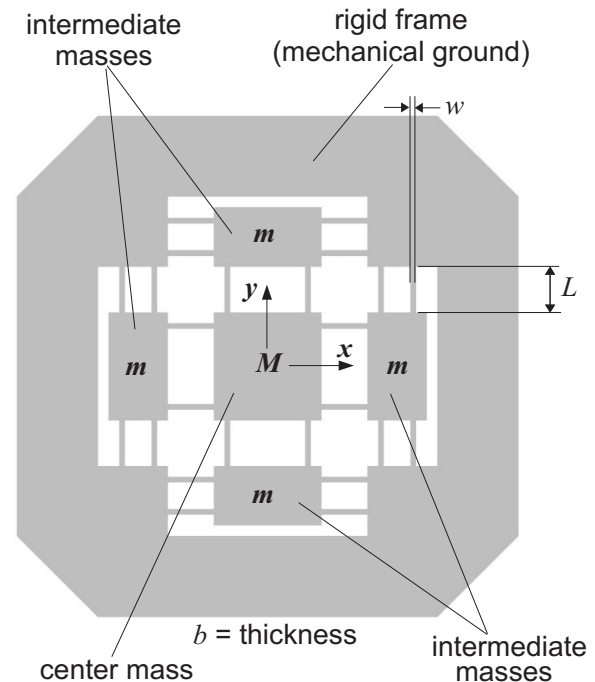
Dimensions and lumped parameters of a rectilinear bearing.
